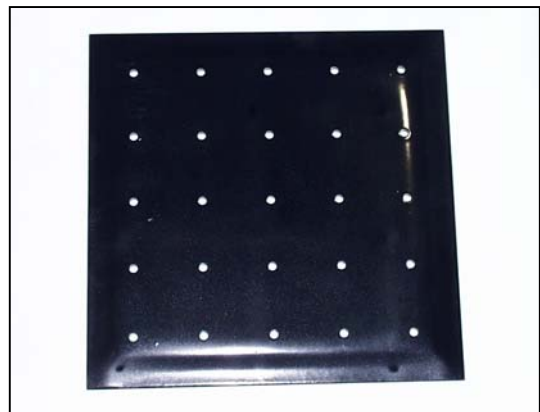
Open hole MRS specimen 8-3-PH
